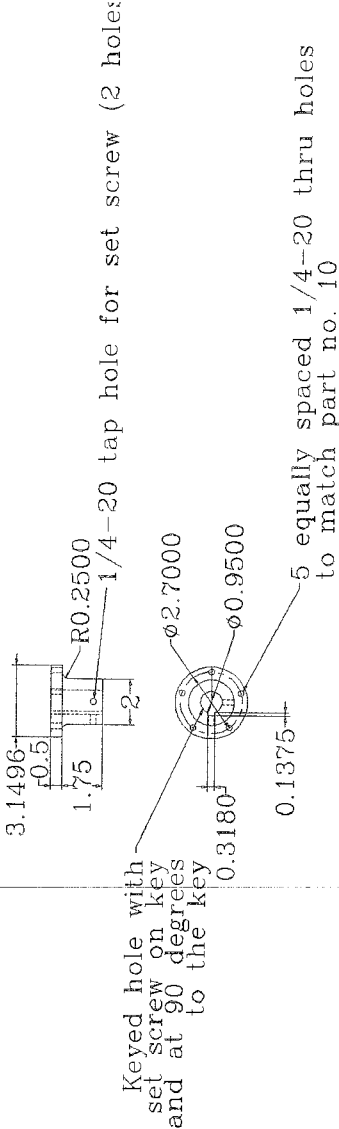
Part No. 10a Motor to Fork Shaft Interface
